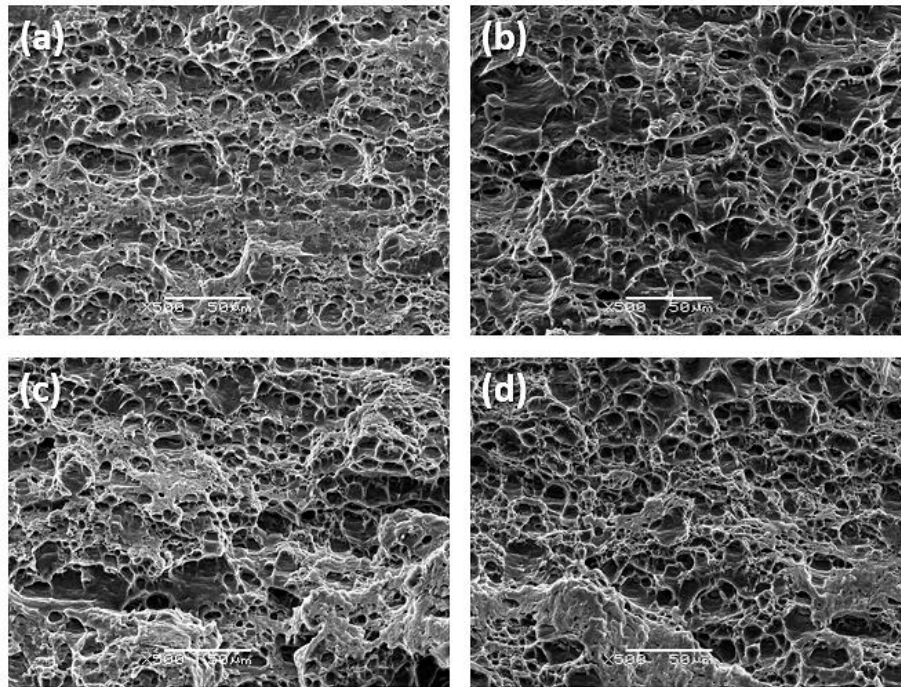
Fracture surface images obtained from tensile specimens for joints (a) A6R6, (b) A5R5, (c) A6R5, and (d) A5R6. Both dissimilar welding samples show a similar mixed fracture mode to A6R6.
